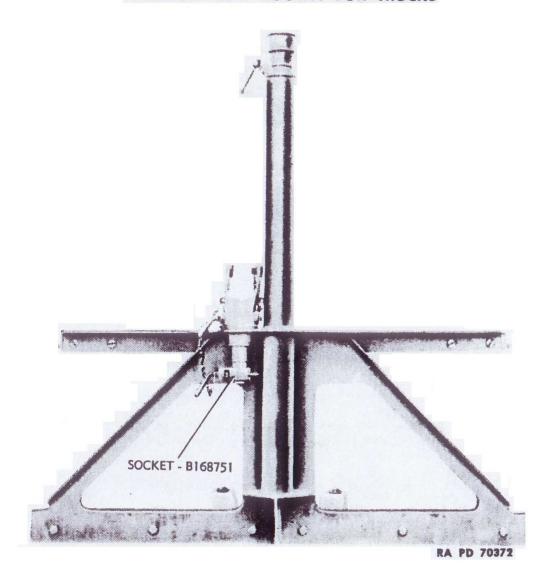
Truck Pedestal Mount M24—Rear View with Pintle in Auxiliary Socket
